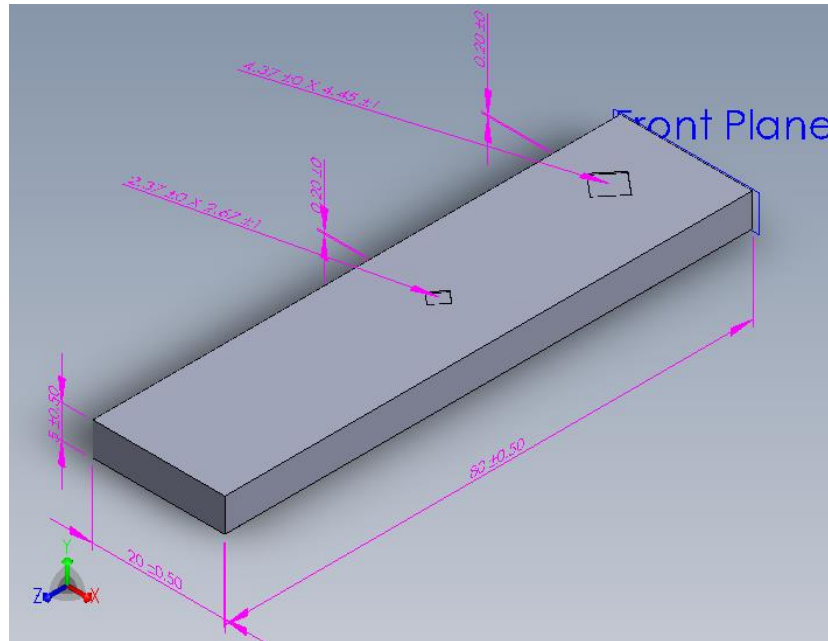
Analysis of Surface Defects on Coating - Scheme
